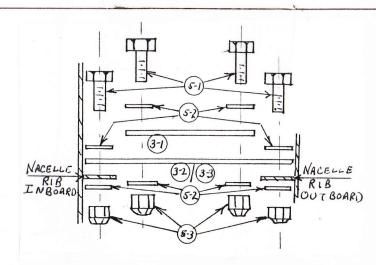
Mounting Cross Section/Assembly - Secondary installation Left side on Nacelle Ribs. View Looking Aft.
